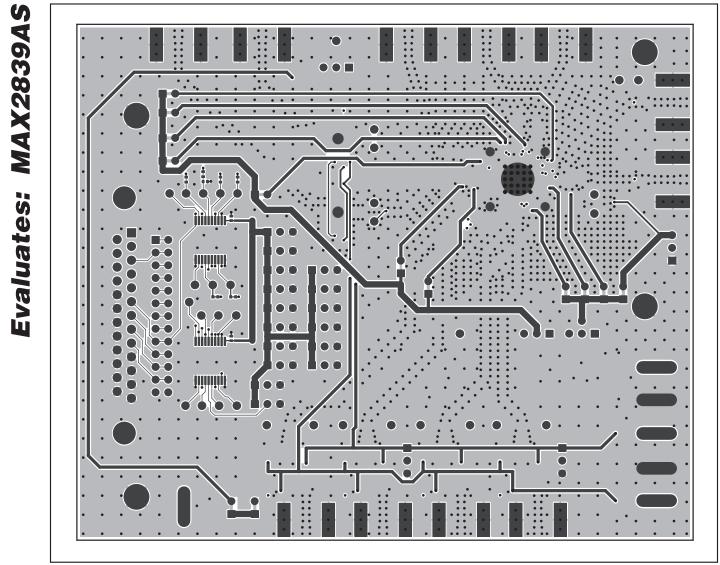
MAX2839AS EV Kit PCB Layout—Solder Side
